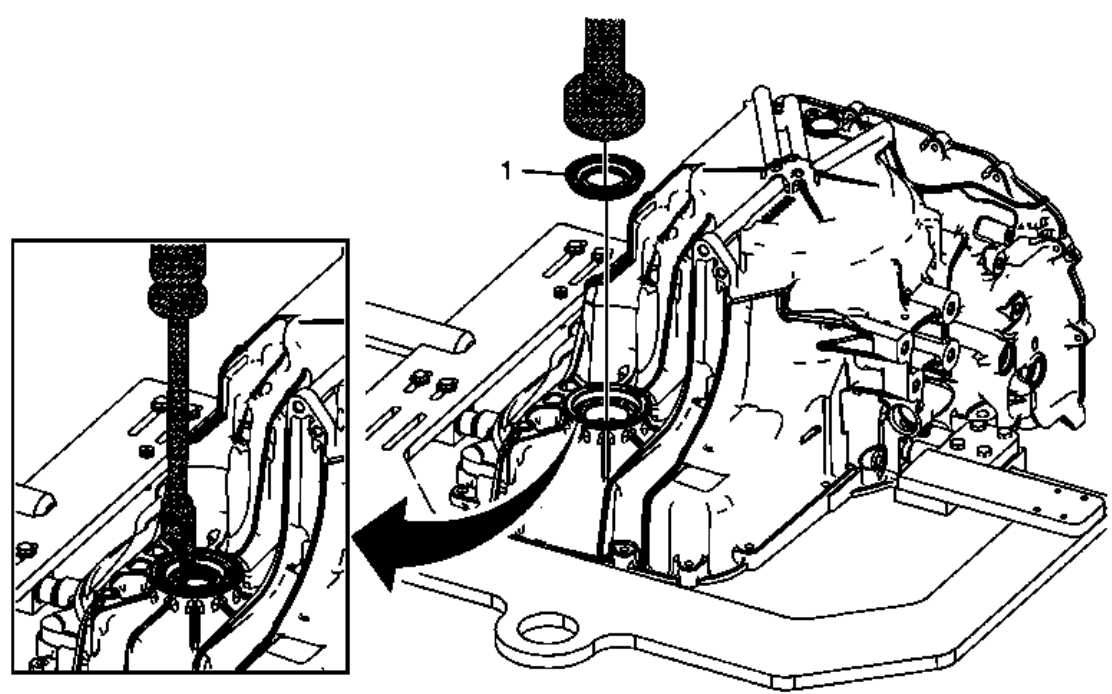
View Of Case Side Front Wheel Drive Shaft Seal
